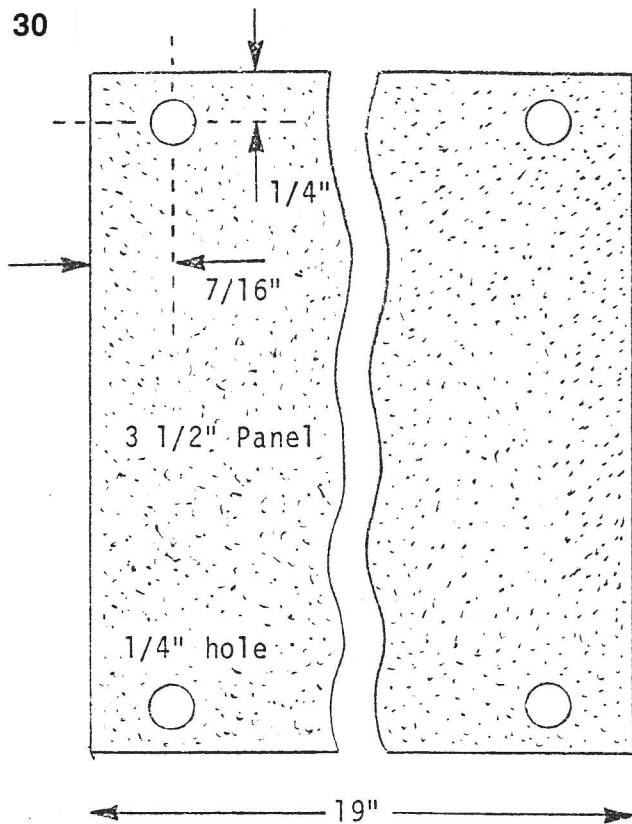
Panel drilled with 1/4" holes. Spacing of holes is always 1/4" from edge or 1.5" from edge (See Fig. 3)
